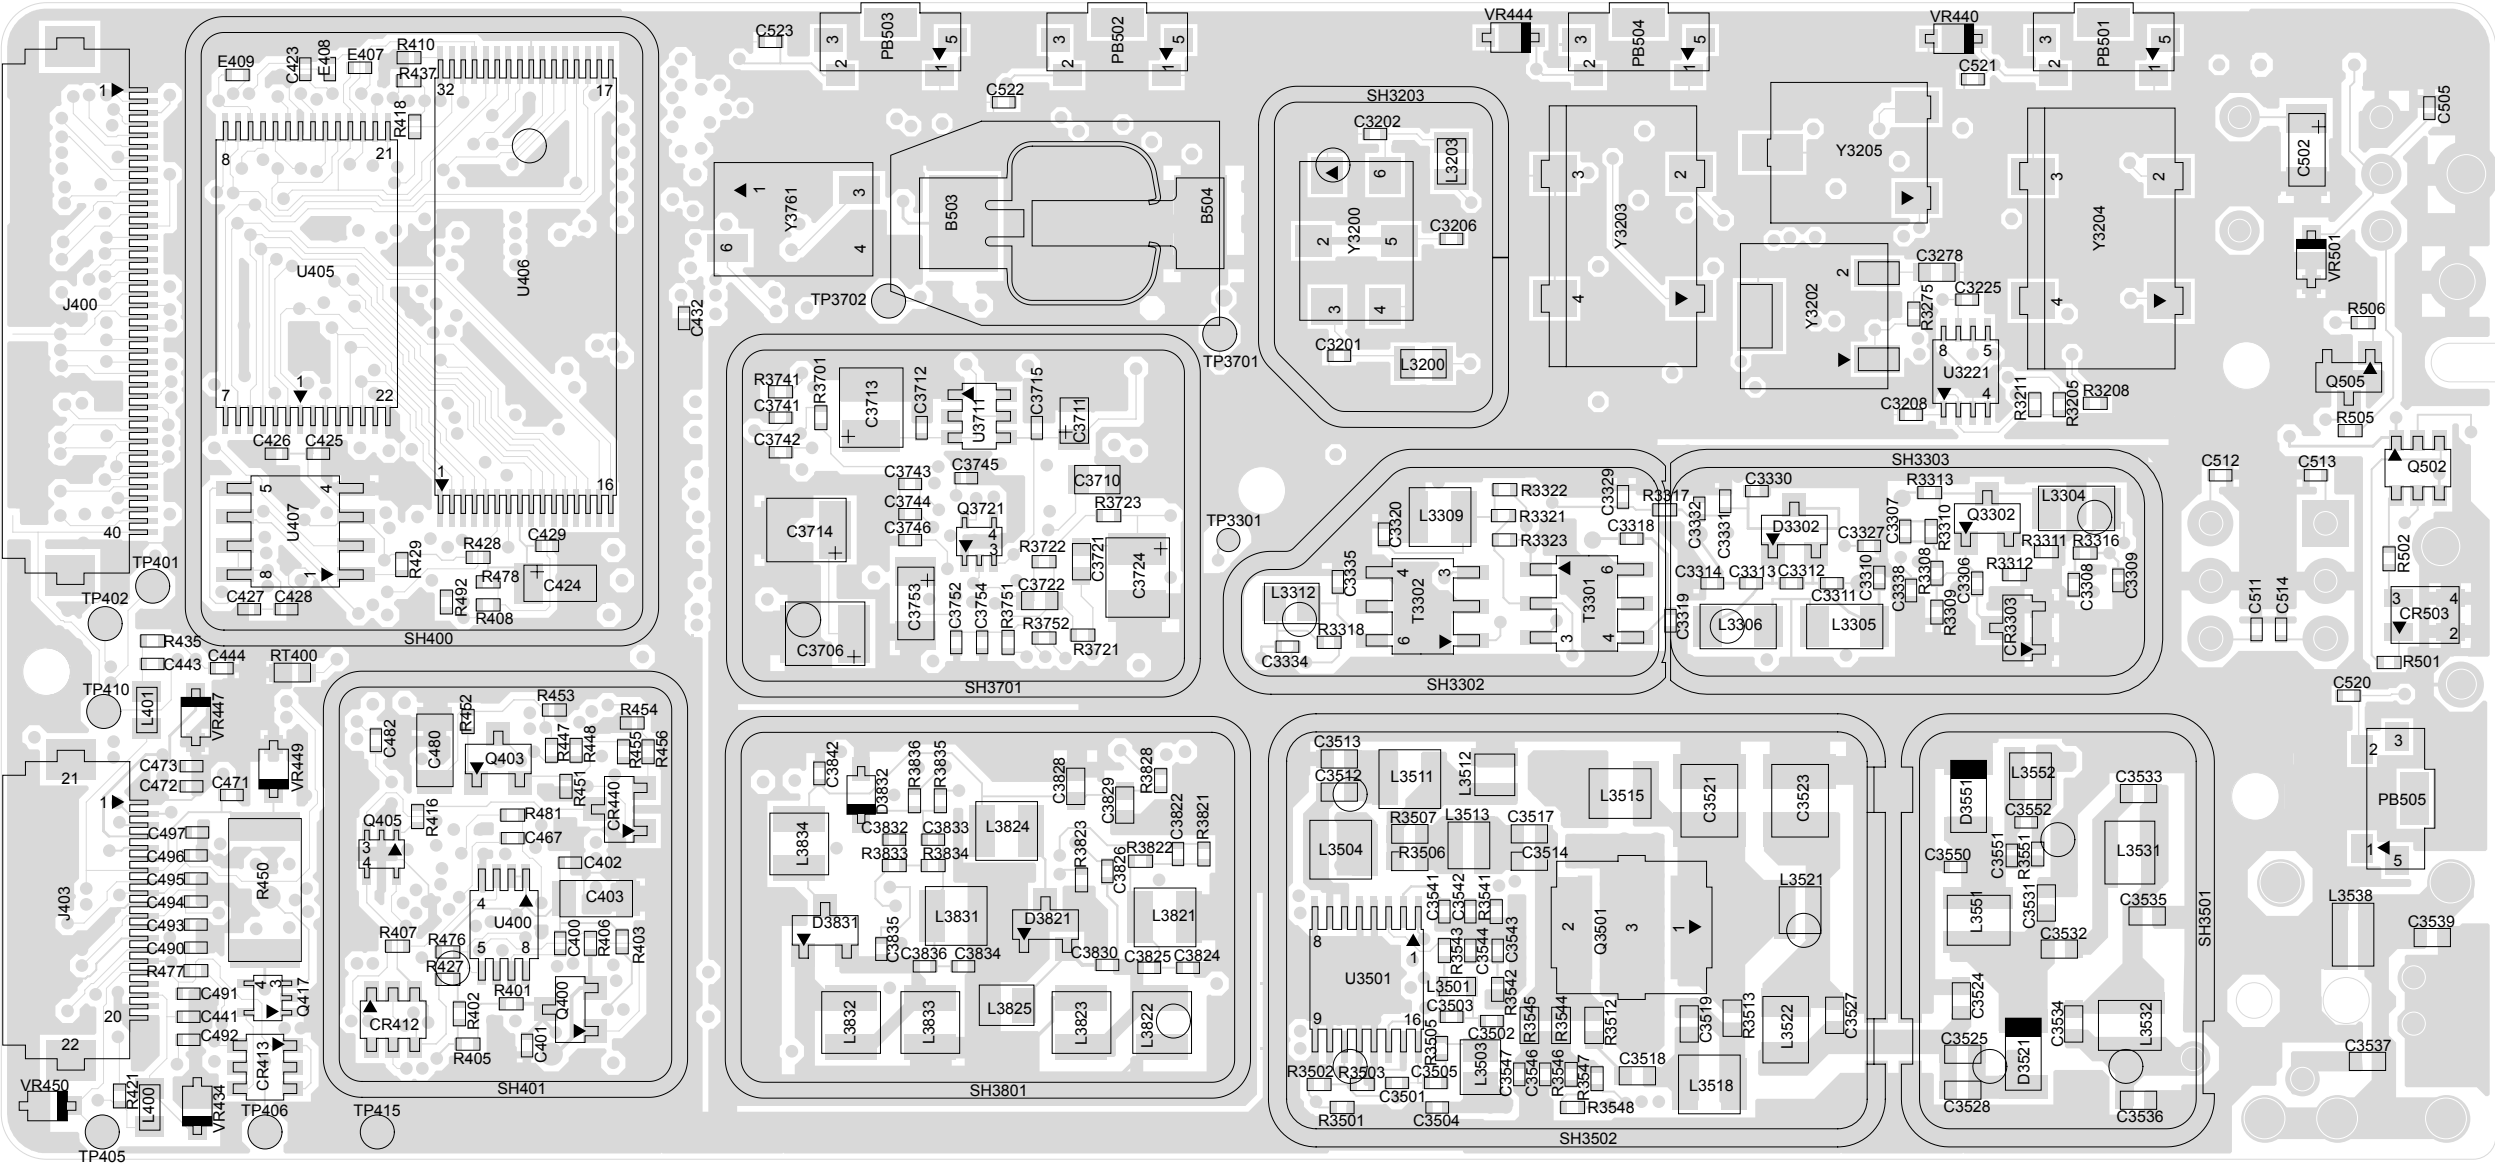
VHF (136–174 MHz) Main Board Top Side PCB 8486473Z04 rev. C
